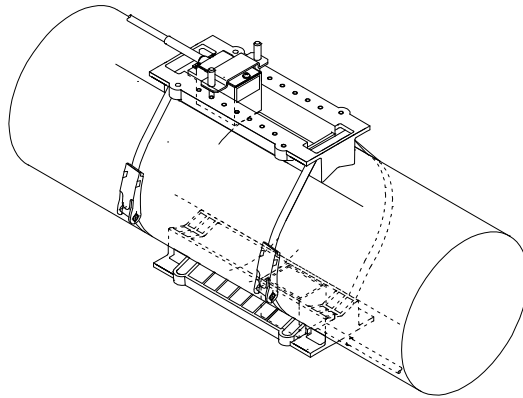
Checking the transducer mounting interval – B
